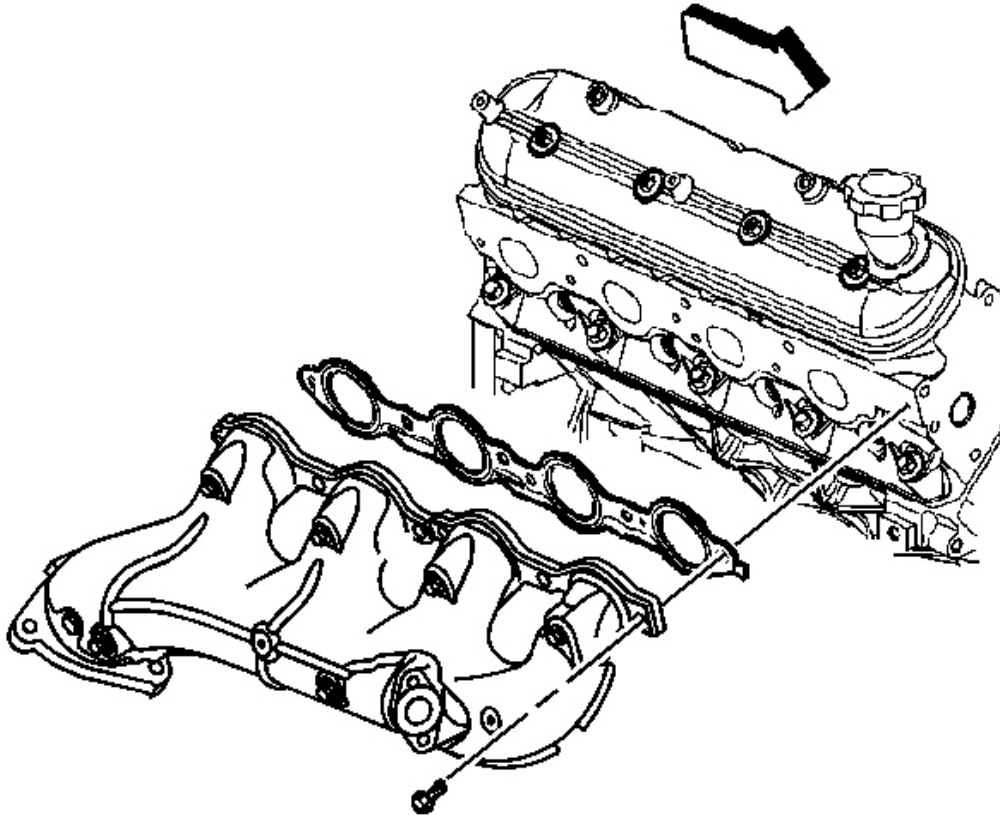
View Of Right Exhaust Manifold (4.8L, 5.3L, 6.0L)
